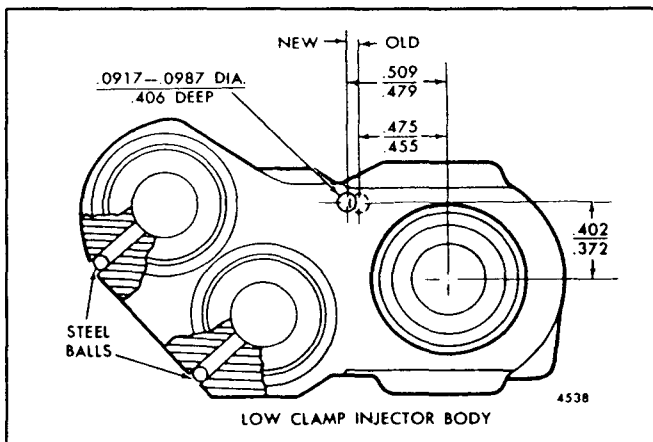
Relocating Timing Pin Hole in Injector Body
